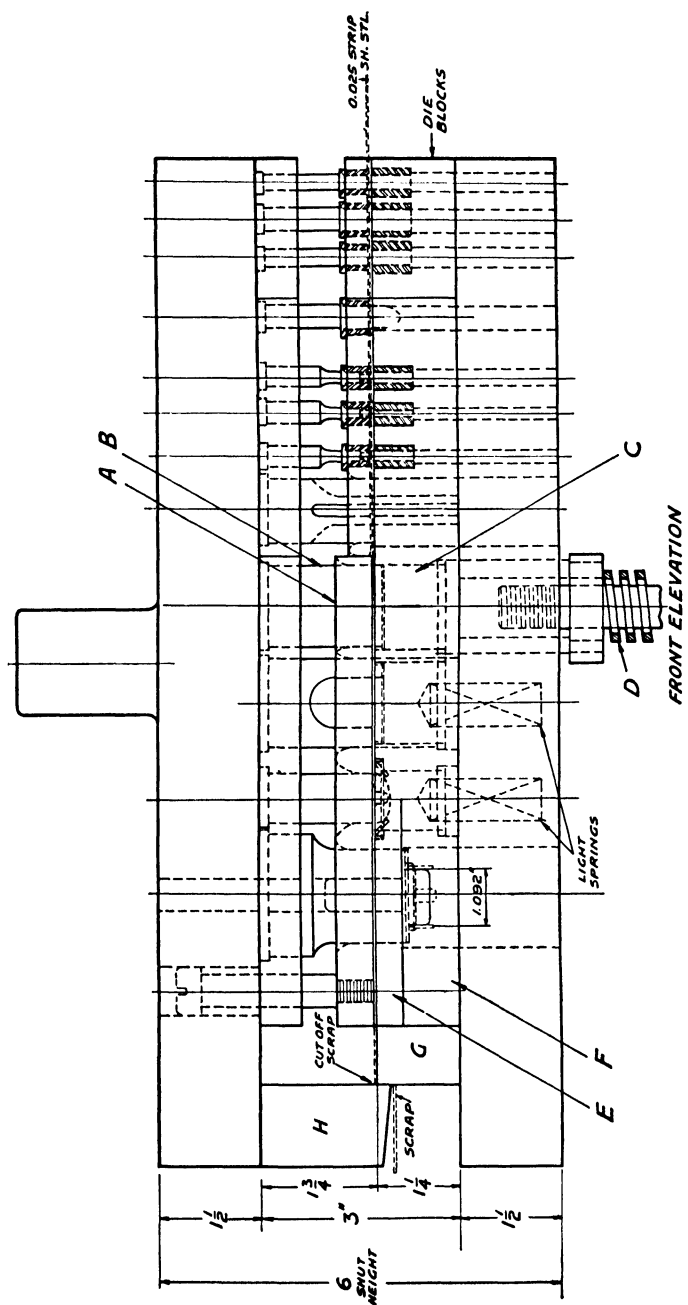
Drawing of a high-speed progressive die that completes nearly 4,000 pieces of work per hour.
